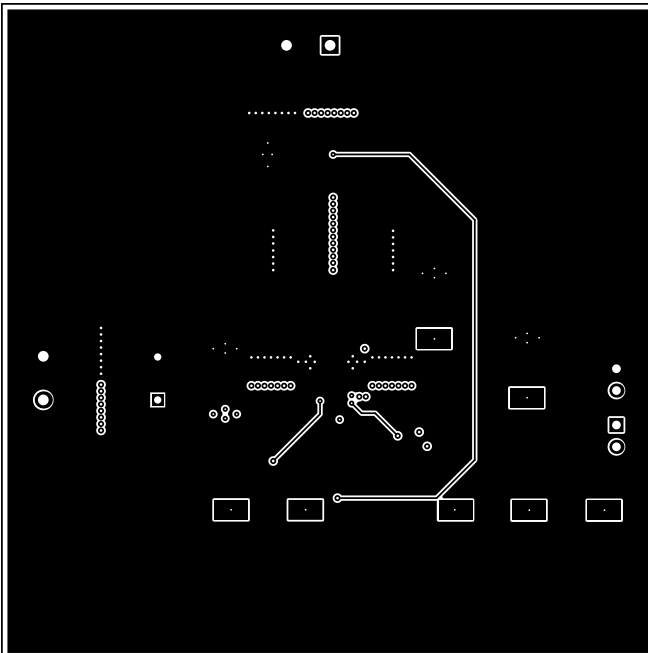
TPS54424EVM-779 Bottom-Side Layout
